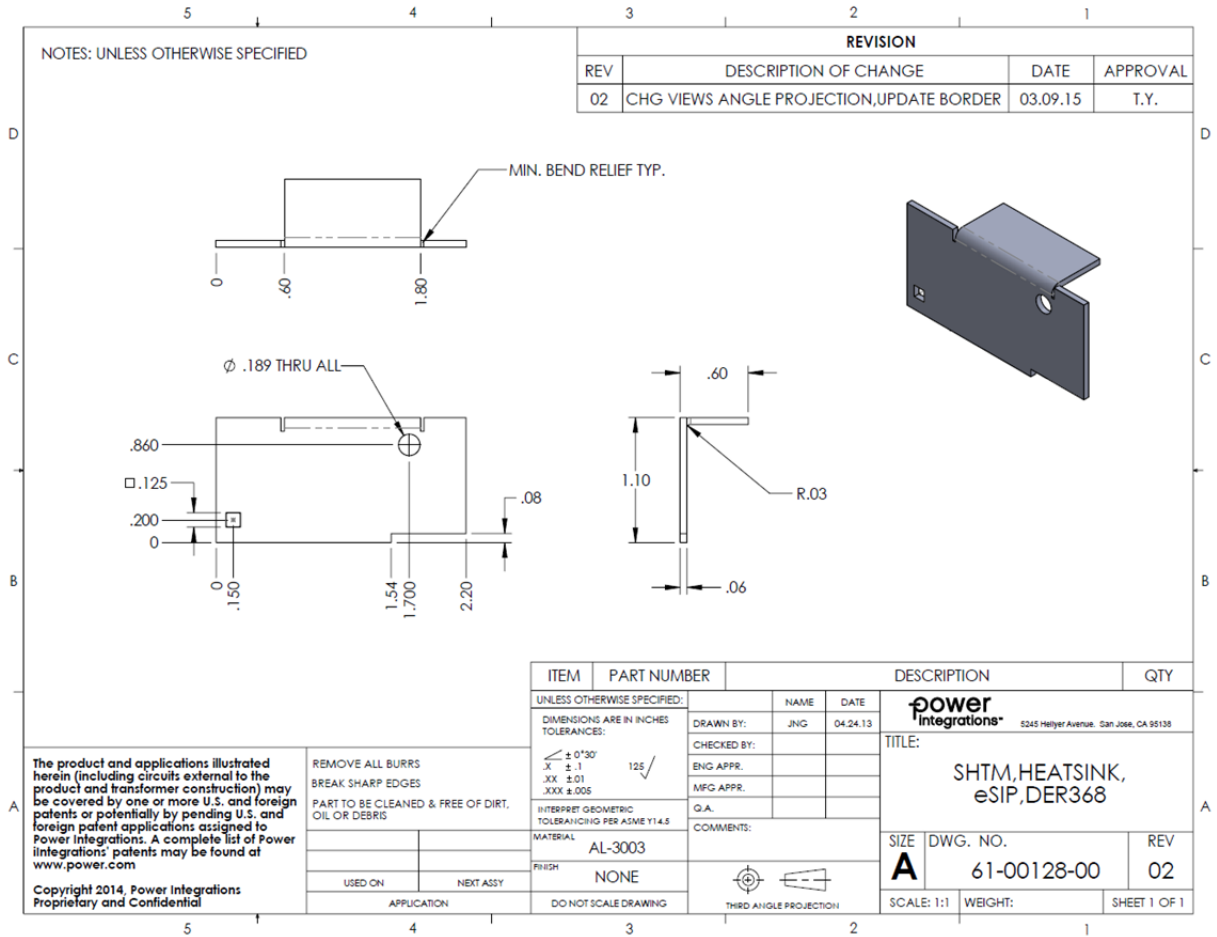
Primary Heat Sink Sheet Metal Drawing.
